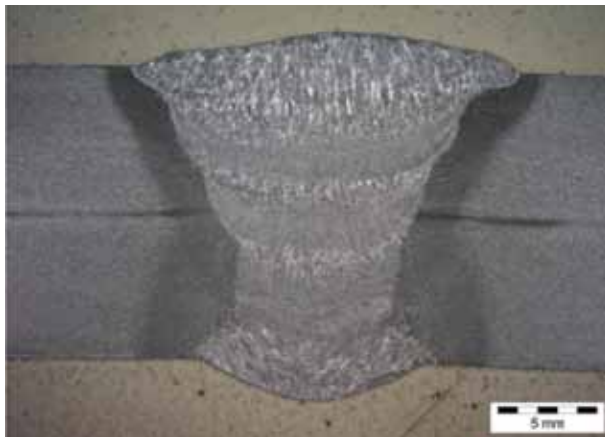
The cross section of a P1 joint welded with Böhler DMO Ti-FD (E81T1-A1M) flux cored wire and the Ar 18% CO₂ shielding gas mixture.
